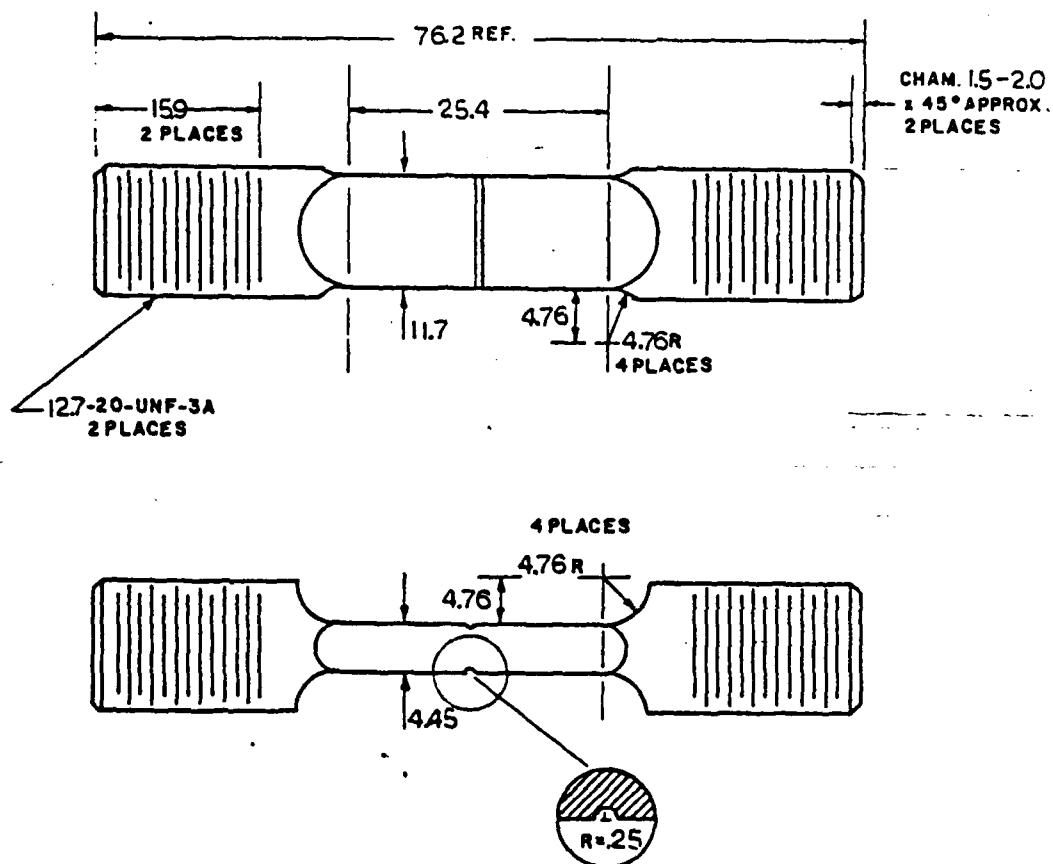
Single Edge Notched (SEN) specimen geometry used in CCGR tests. (Dimensions in mm)
